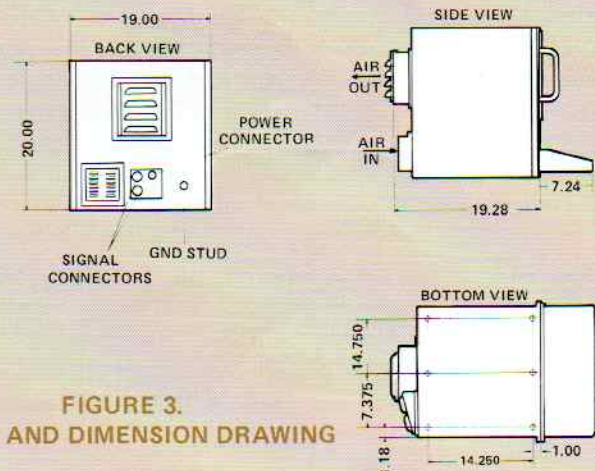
OUTLINE AND DIMENSION DRAWING
